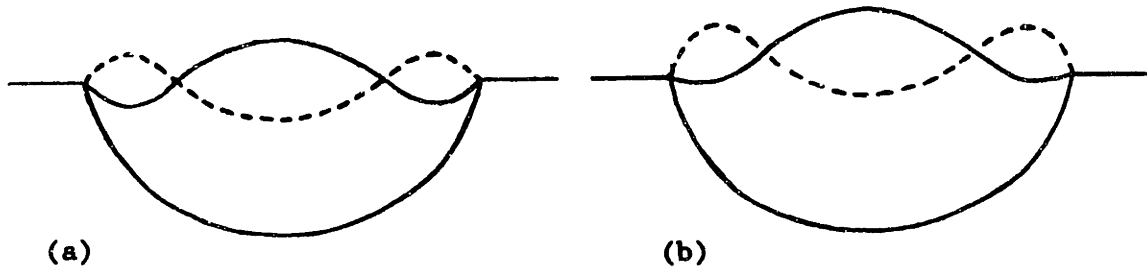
Weld pool surface oscillatory modal shapes for axisymmetric stationary welds: a) GTA, b) GMA.
